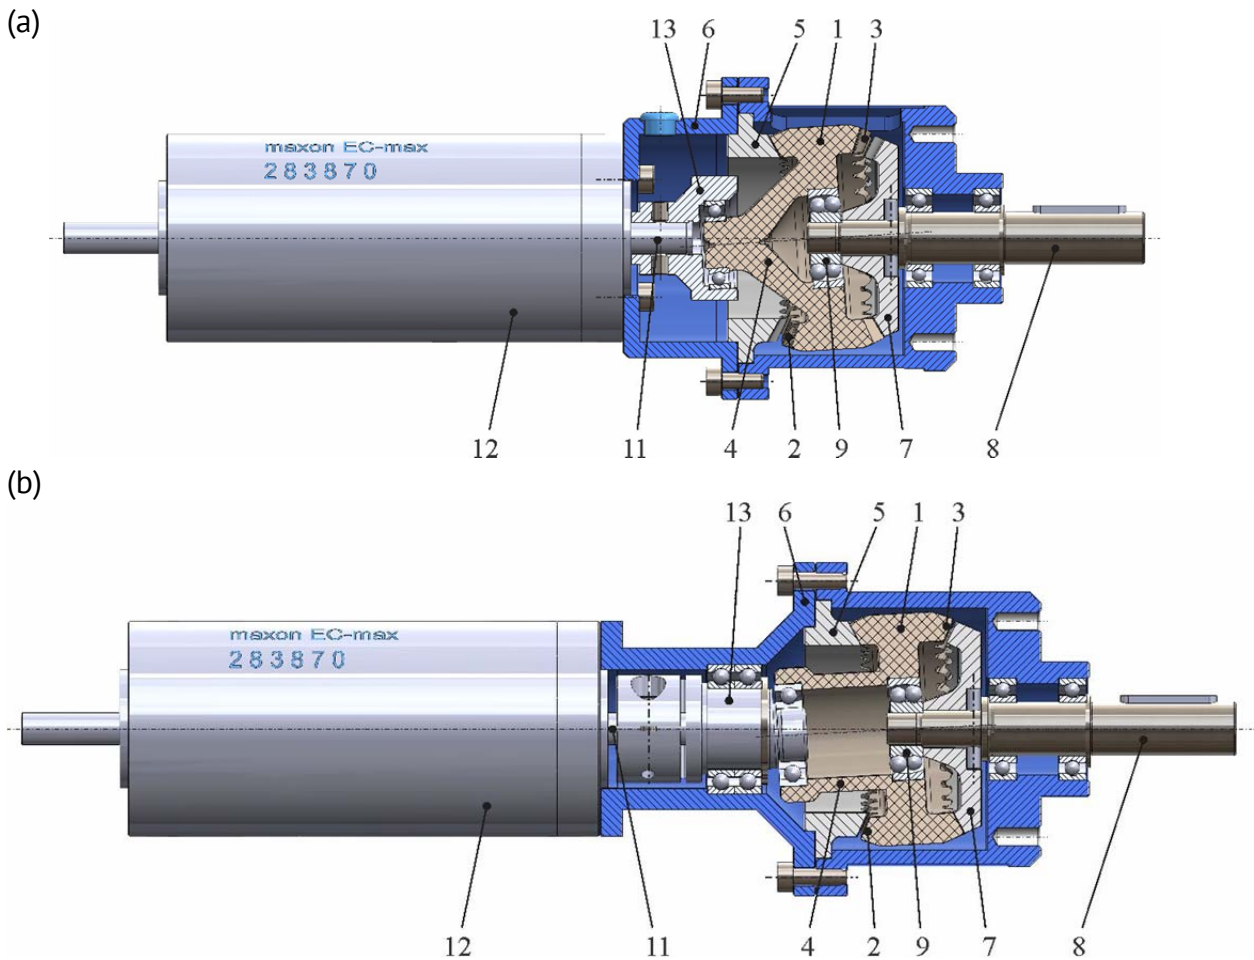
Precessional gearmotors with convex-concave gear of the teeth with the crank shaft in the shape of a conical cupola, $i=-124$ (a) and with the crank shaft in the tubular form, $i=-90$ (b).
